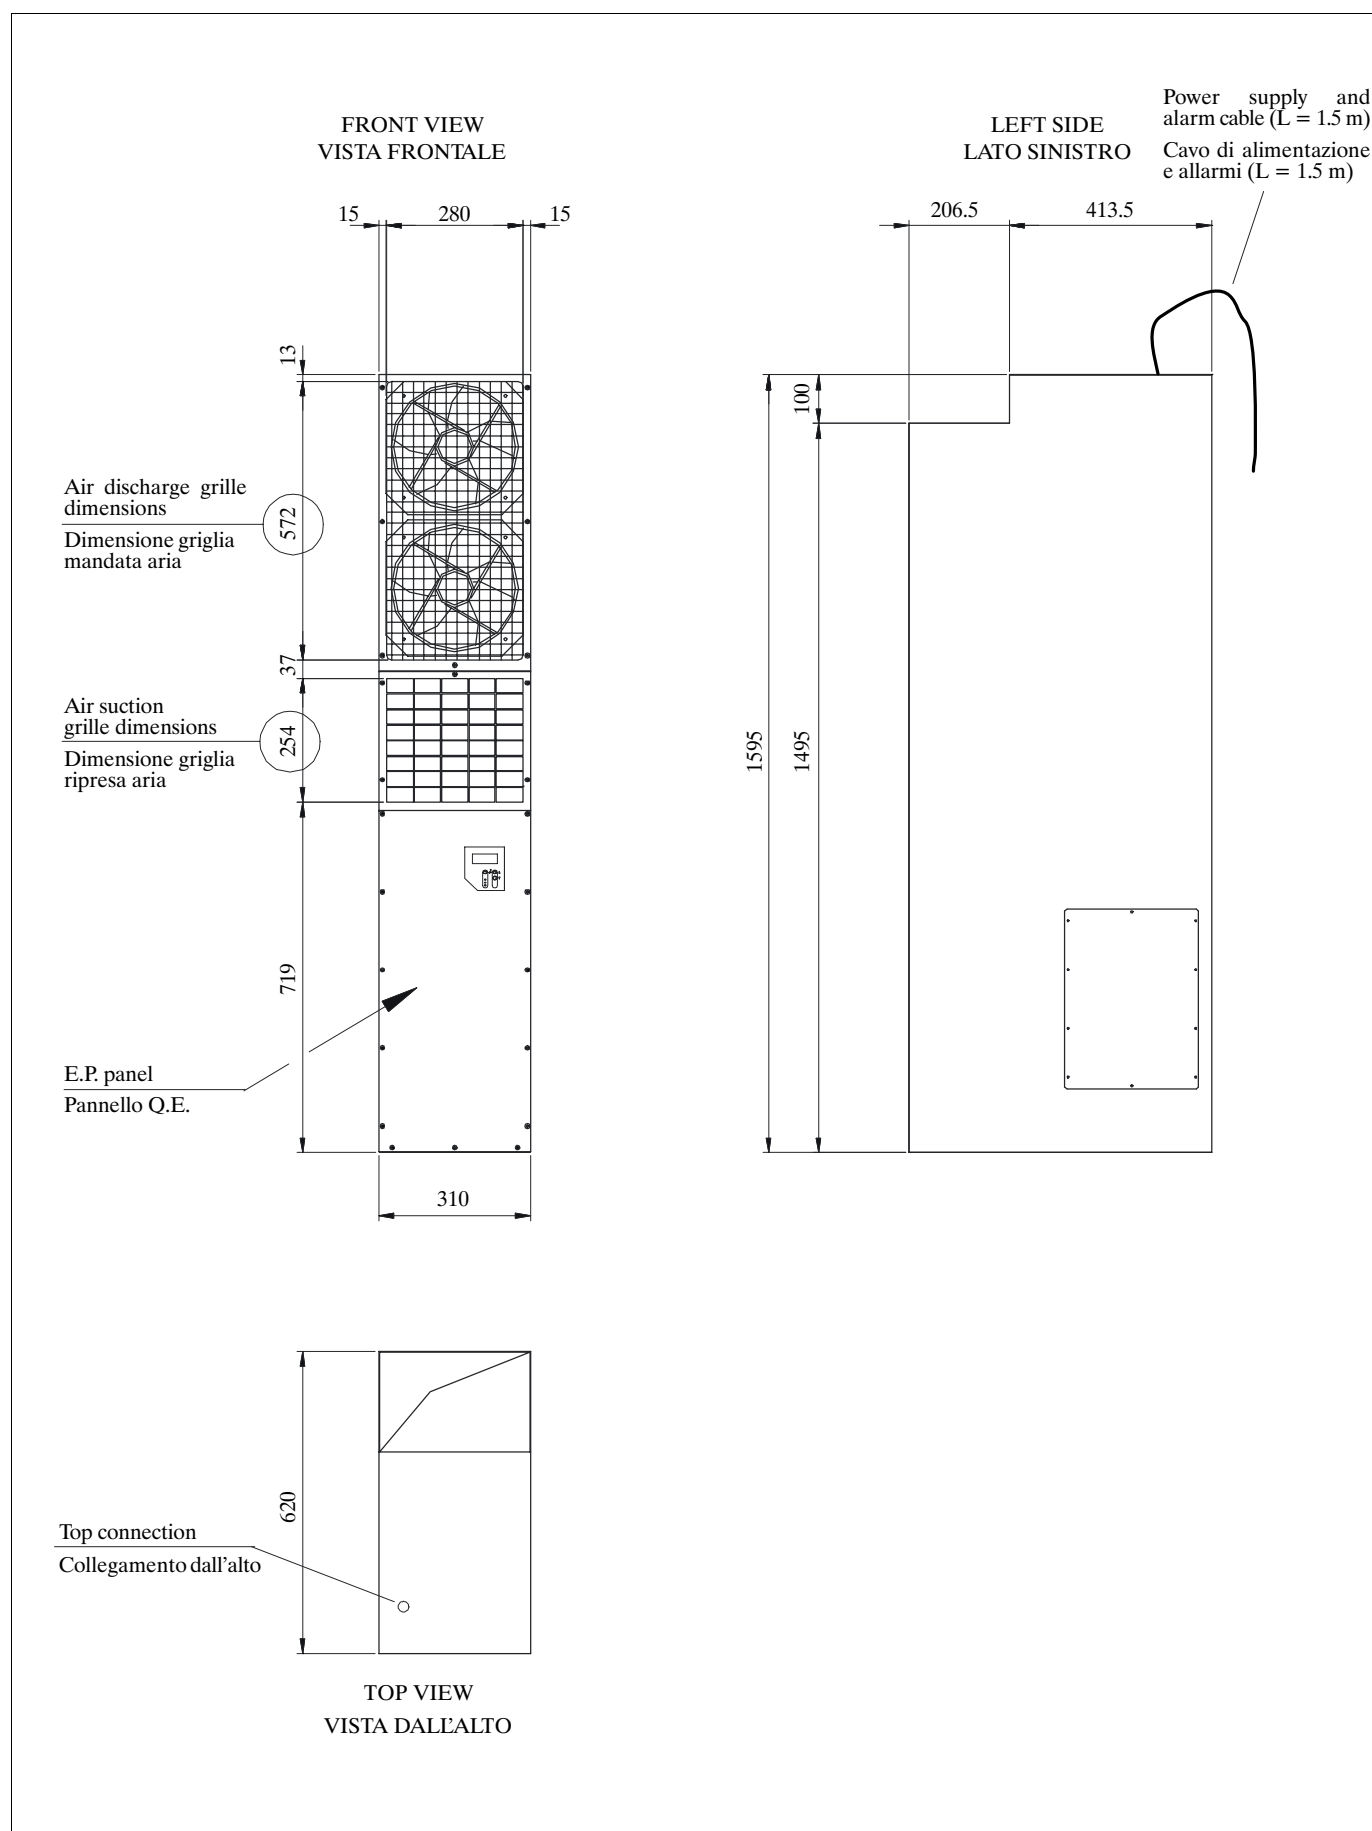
Overall dimensions / Dimensioni di ingombro
